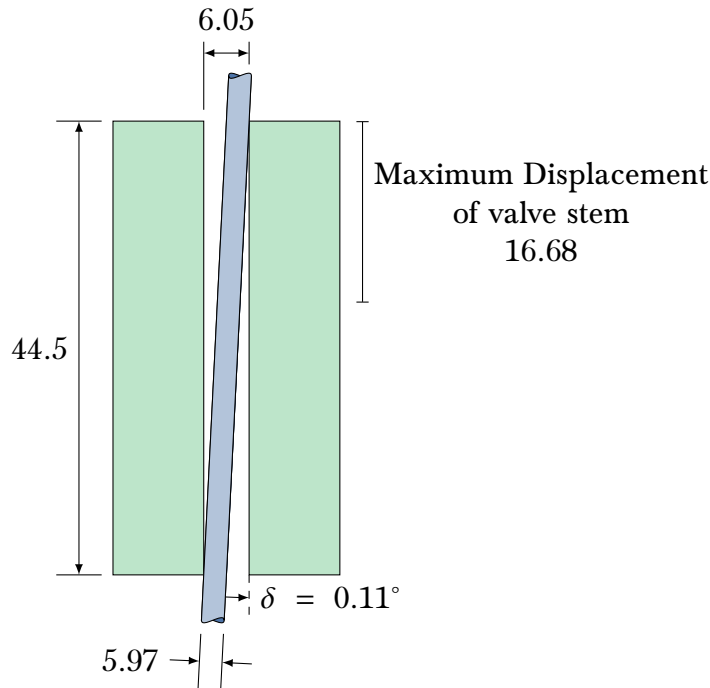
A schematic of the valve stem and valve guide, all dimensions in mm.
